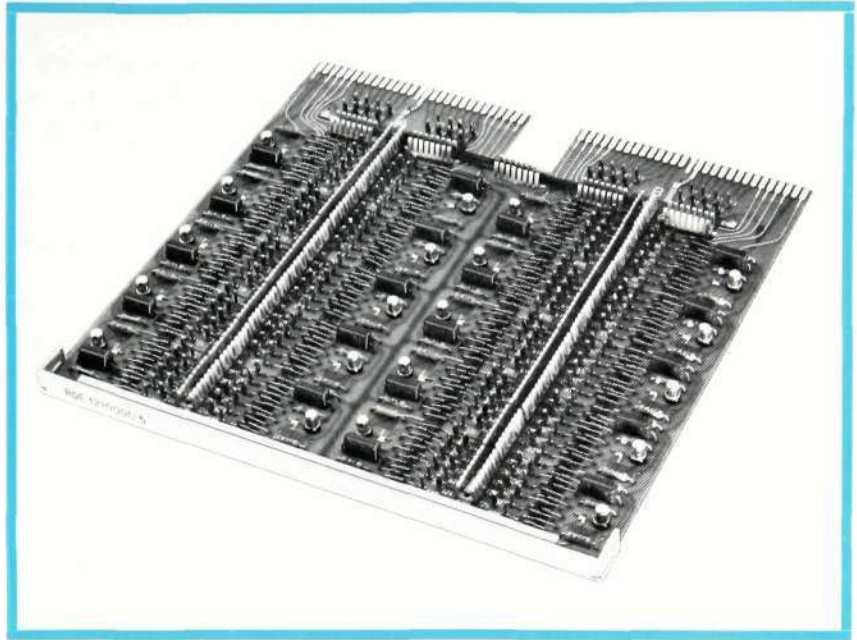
and 4 show the printed board assembly for the 3-module shelf, which is the most used type. Its dimensions are  $98.5 \times 208$  mm and it is made up of 1.6 mm one-sided copper-clad printed boards of flame-resistant paper phenolic laminate. Both material and design comply with international standards (IEC 52 CO 24 and CO 43).
